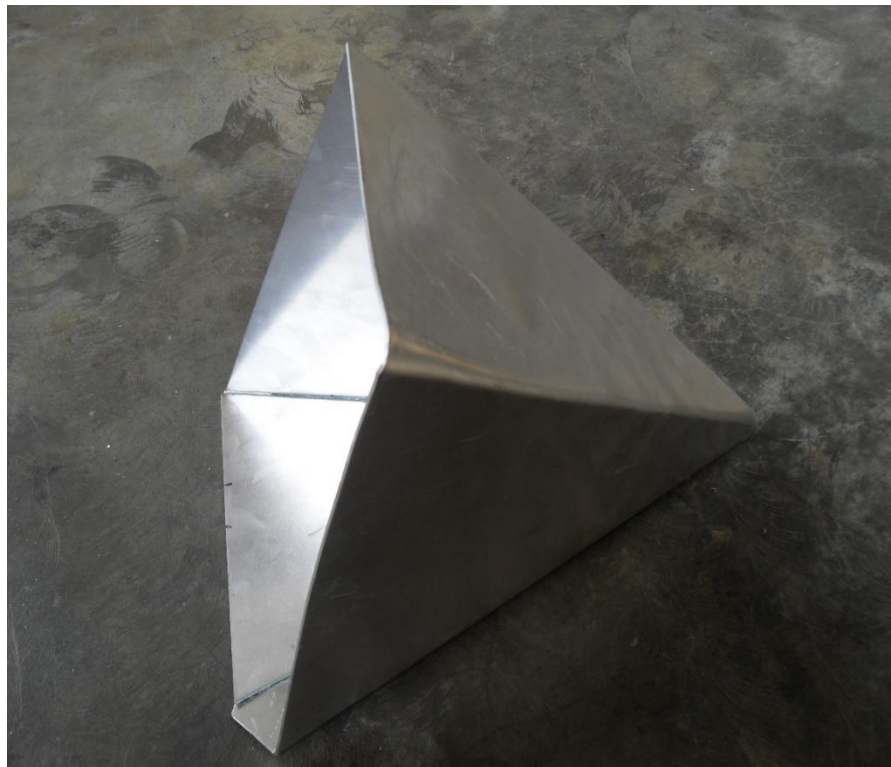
CST Prototype of Horn Reflector using Sheet Metal Bending
